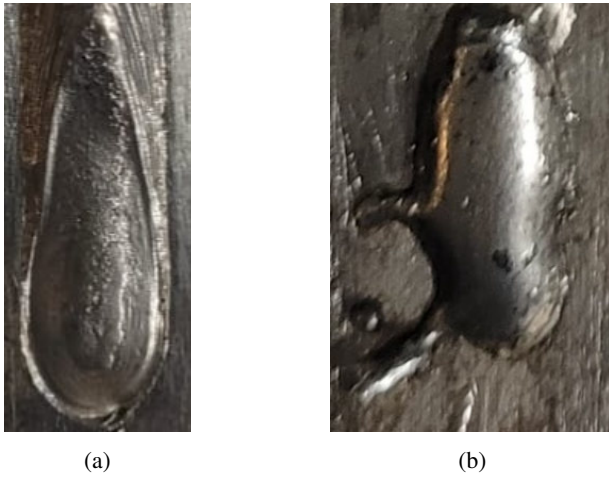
Weld pool images from the database: (a) weld pool from acceptable welds and (b) weld pool from unacceptable welds
